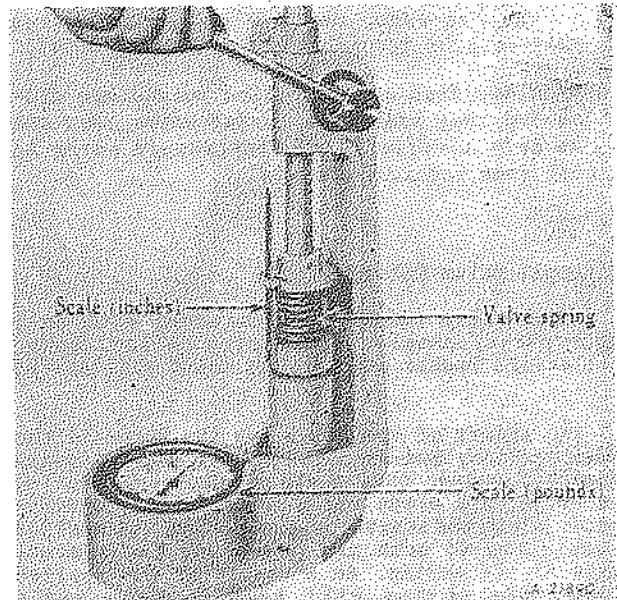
Use a valve spring testing tool or similar tool to check spring tension
